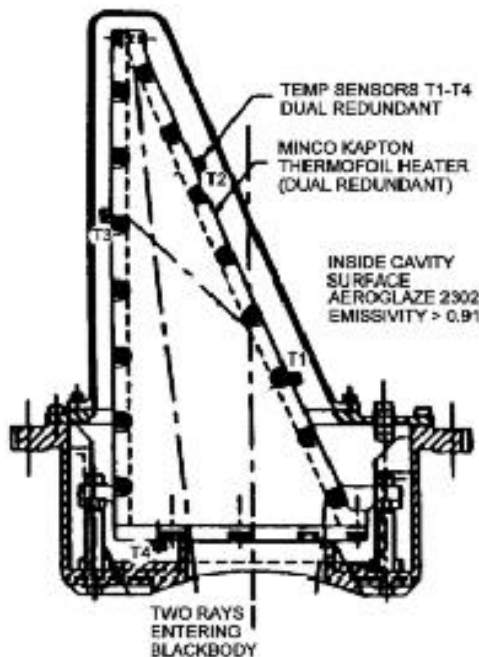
a. Cross-section of the in-flight radiometric calibrator assembly.
